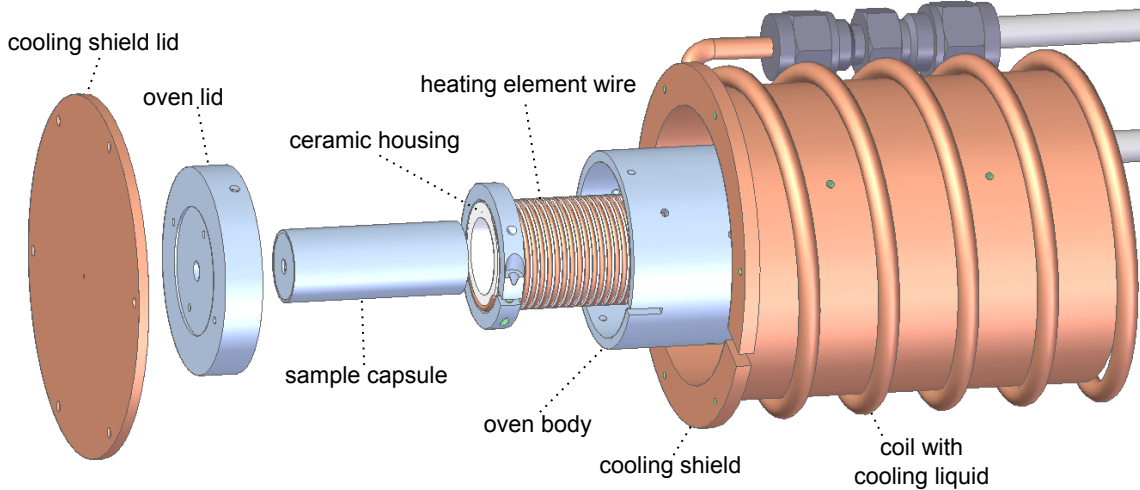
The resistively heated oven used for evaporation of fullerenes. Fixing screws used to assemble all the components together and the temperature sensor are omitted.
